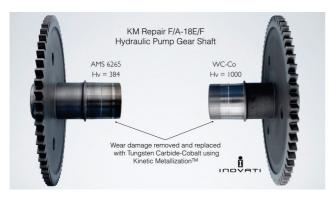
Wear damage on hydraulic pump gearshaft (left); repaired shaft using KM WC-Co coating (right).
